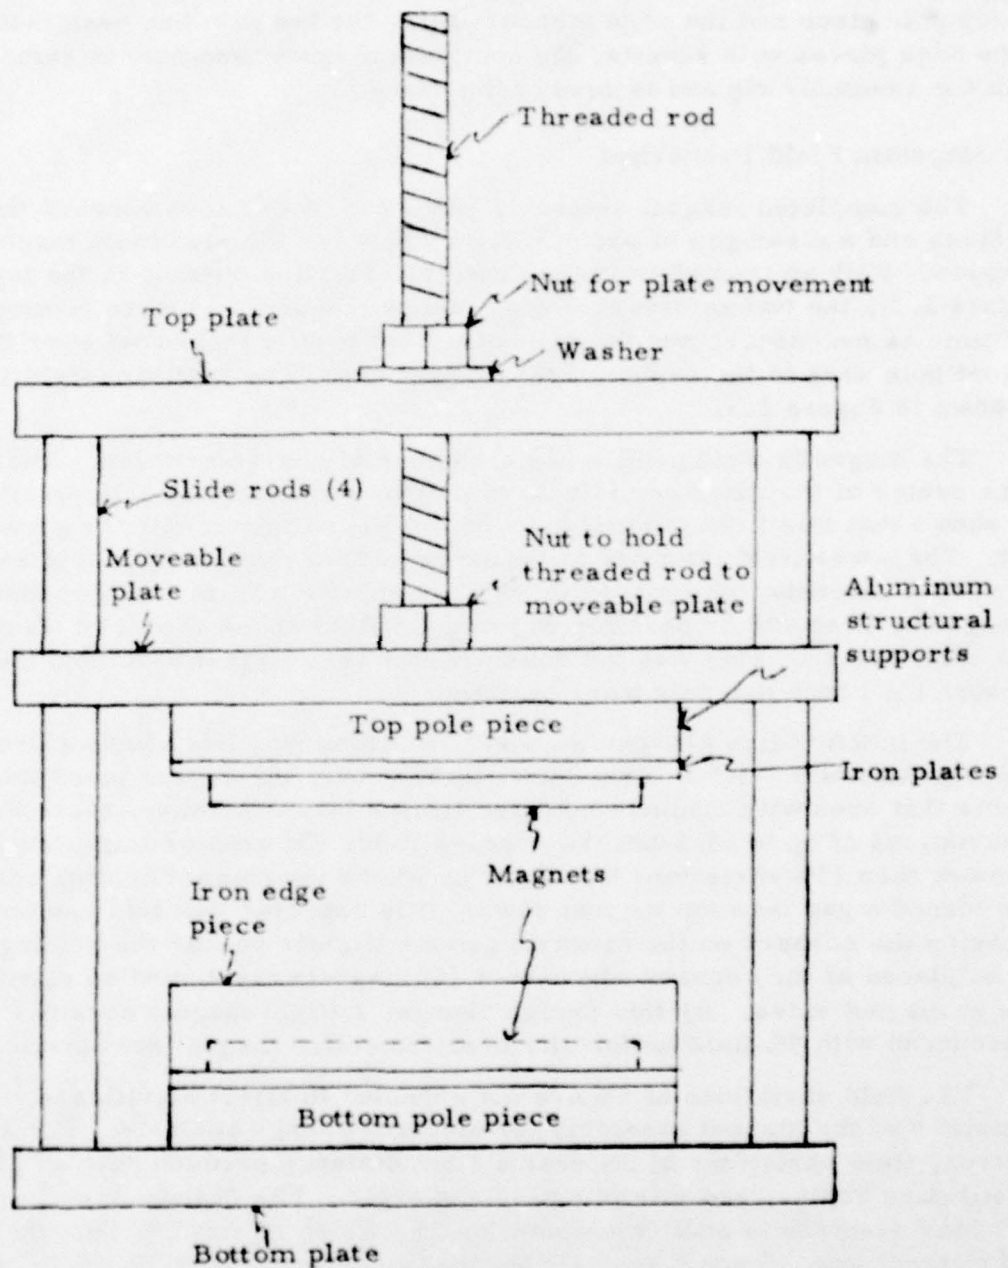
4. Assembly Rig for Magnet Pole Pieces
